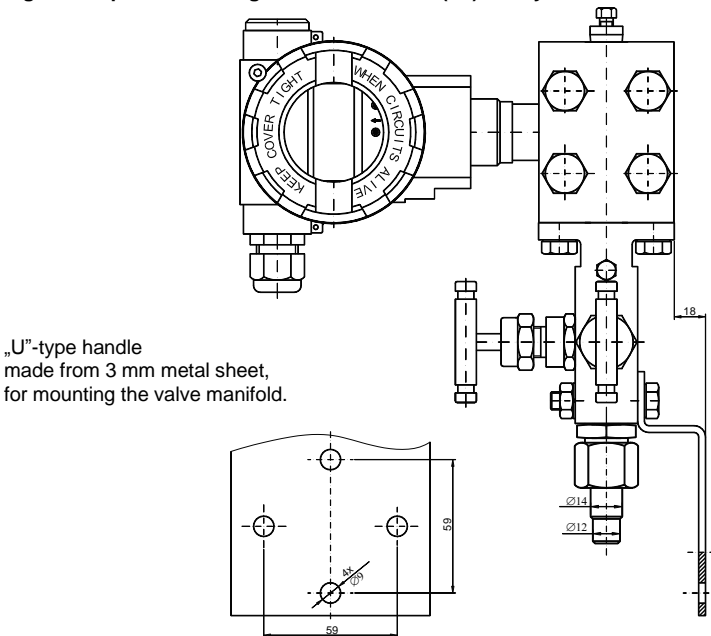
Example of mounting of APR-2000ALW (Ex) Safety transmitter with a valve manifold
